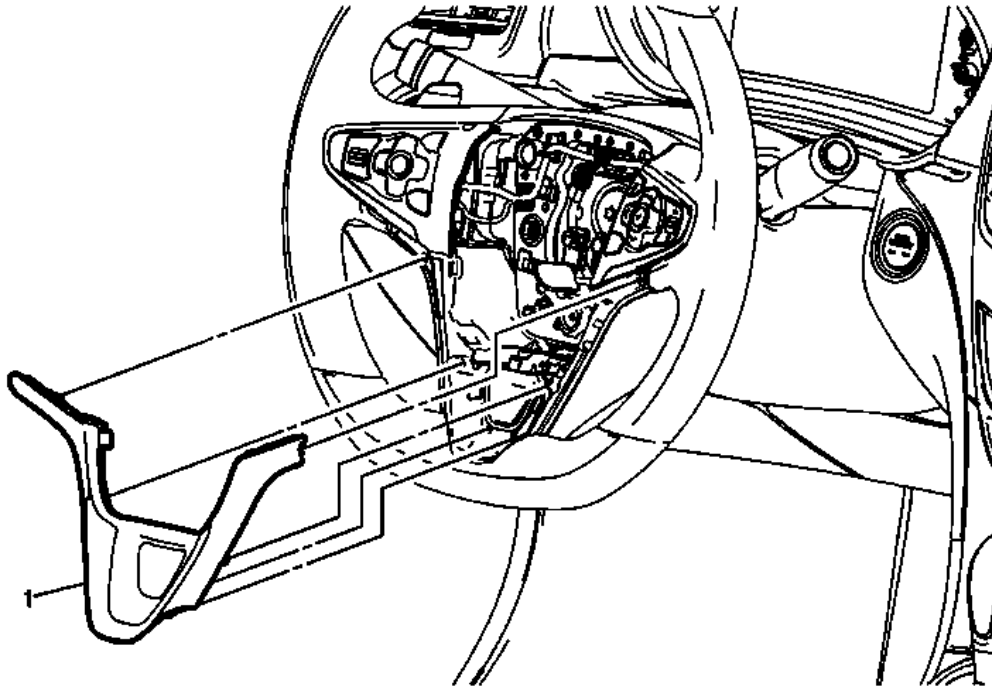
Steering Wheel Spoke Lower Cover (Grand Sport)
